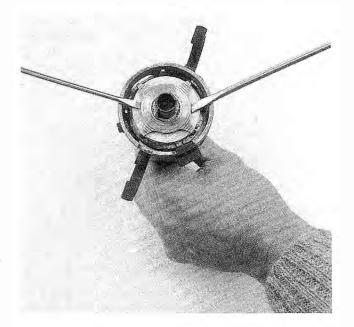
Trigger wheel being removed from distributor shaft. Pry evenly under center of trigger wheel, from both sides using flat-blade screwdrivers.
